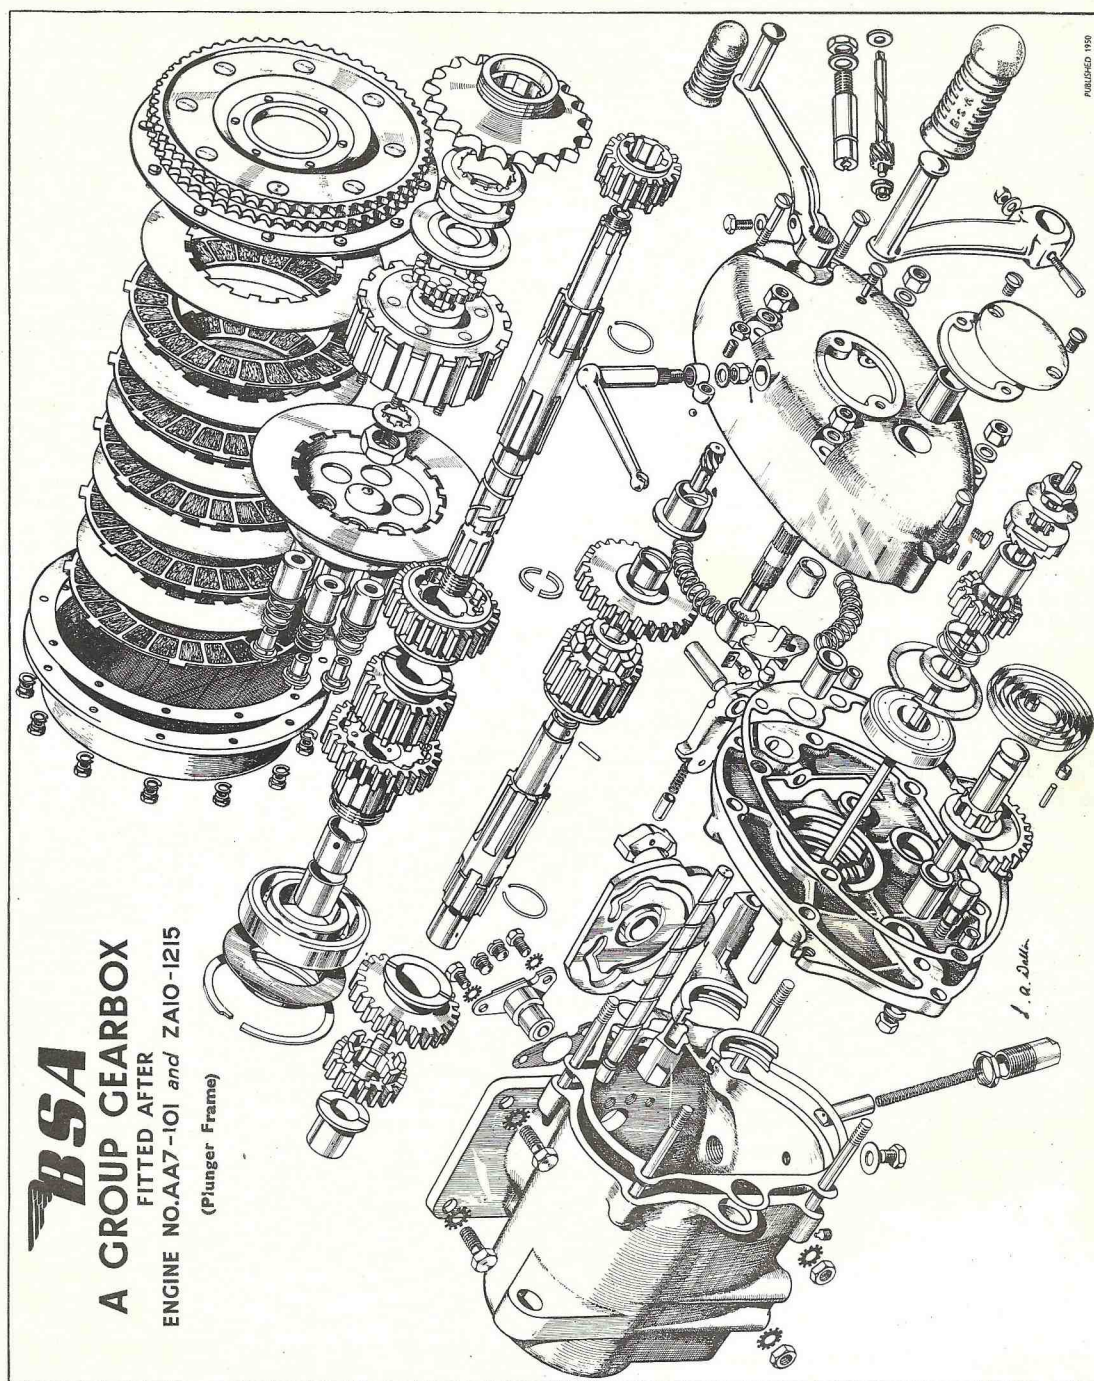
The A7 Engine and Gearbox (Exploded View)
